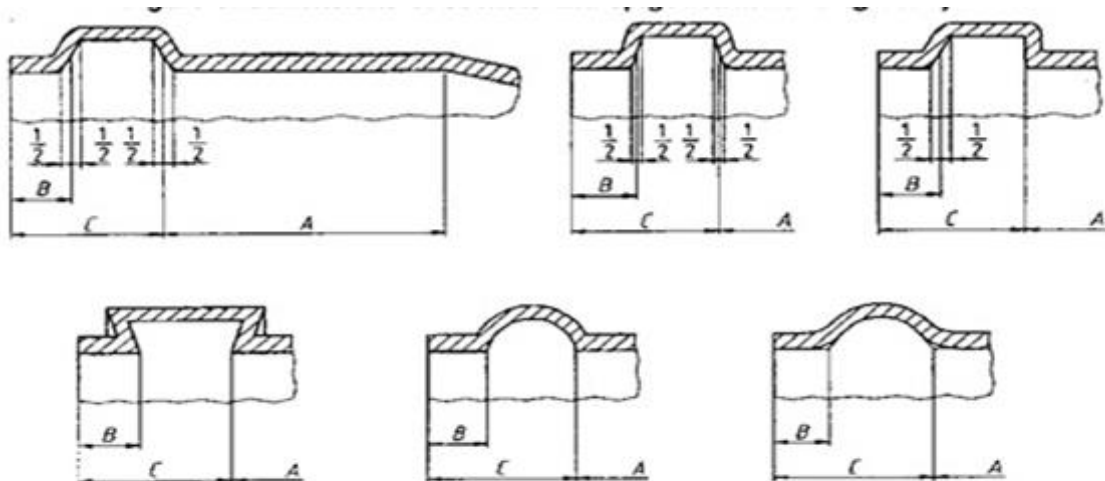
TYPICAL GROOVE DESIGNS FOR RING SEAL SOCKETS
